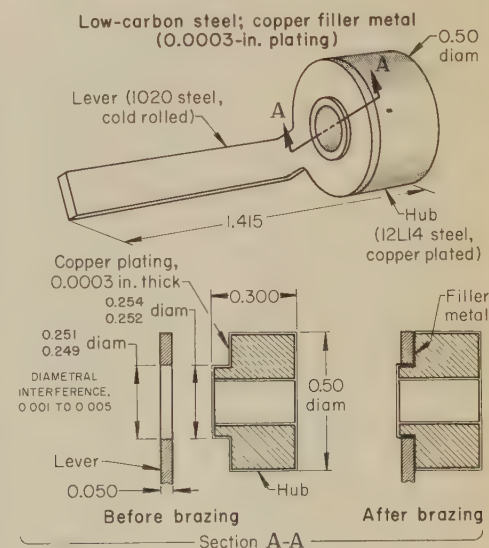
Hub-and-lever assembly for which close control of volume of brazing filler metal was provided by plating (Example 551)
